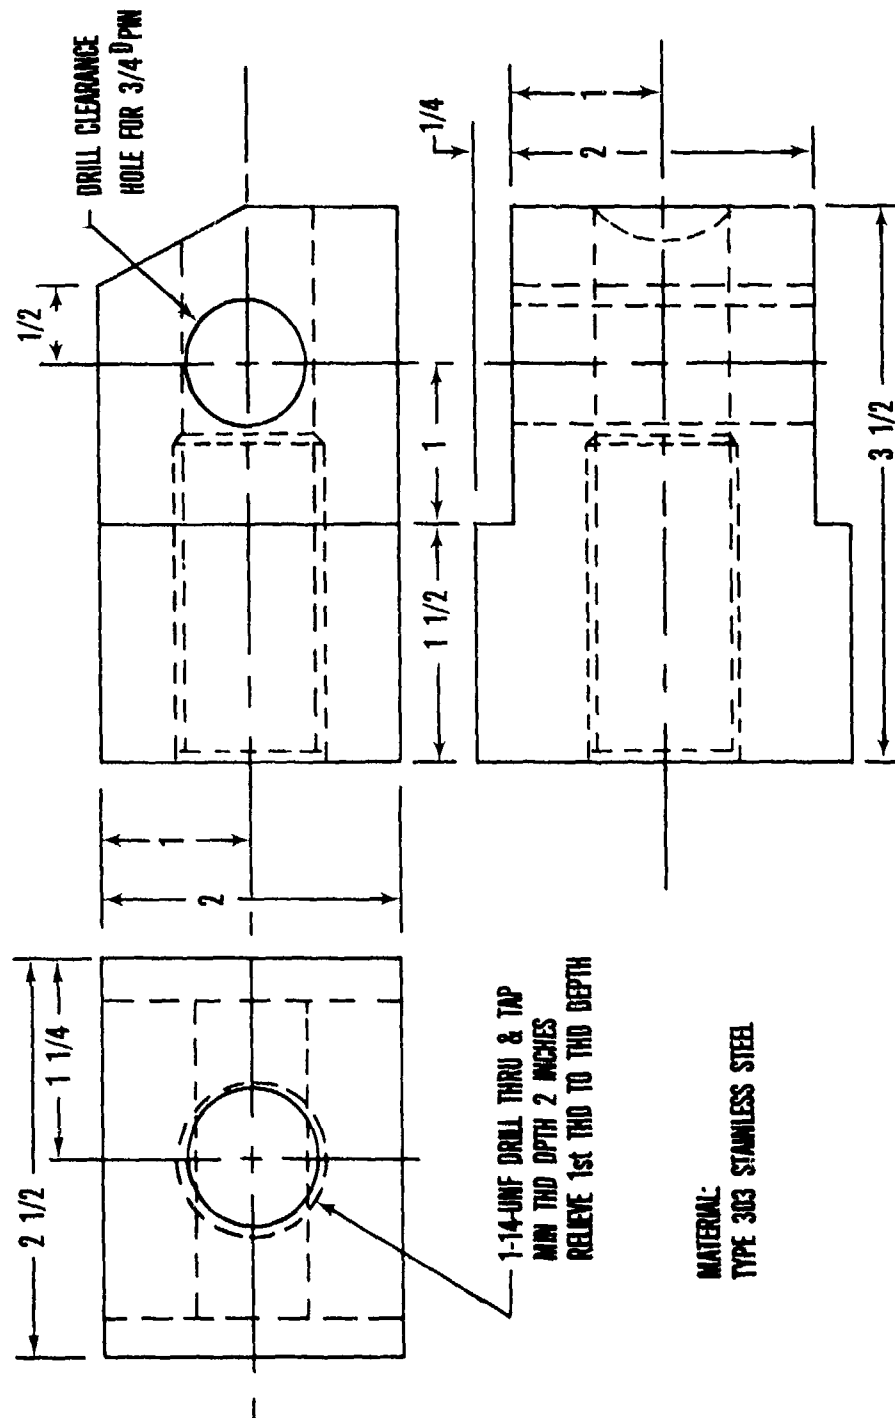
Double Pin Jaw - Attachment Block (Sheet 5 of 7)
